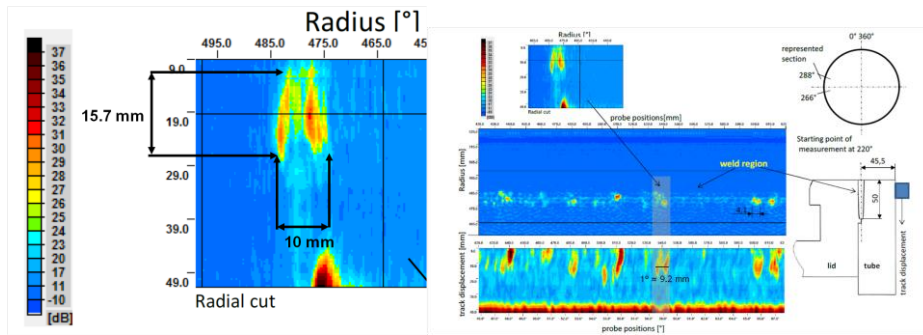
Real weld defects detected and sized using PA-SAFT from the weld specimen Xk033.
